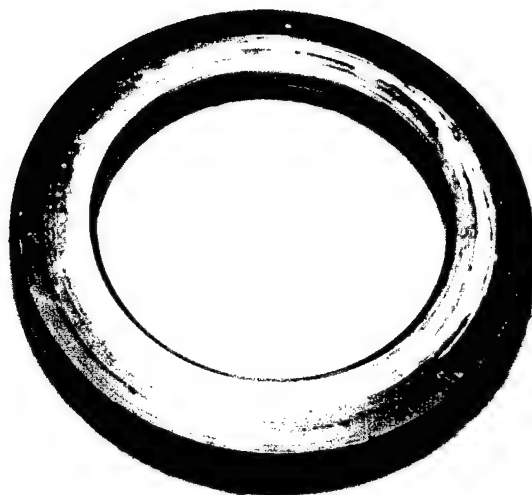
Dust Deflector Side in Contact with Mounting Plate
